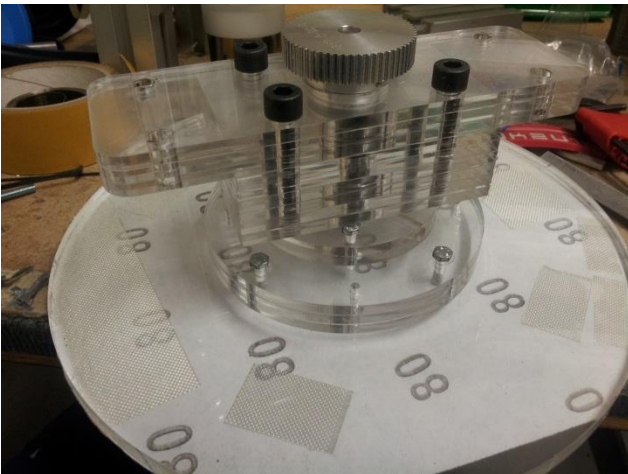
After the top disc is assembled the base that holds the bearings can be assembled
